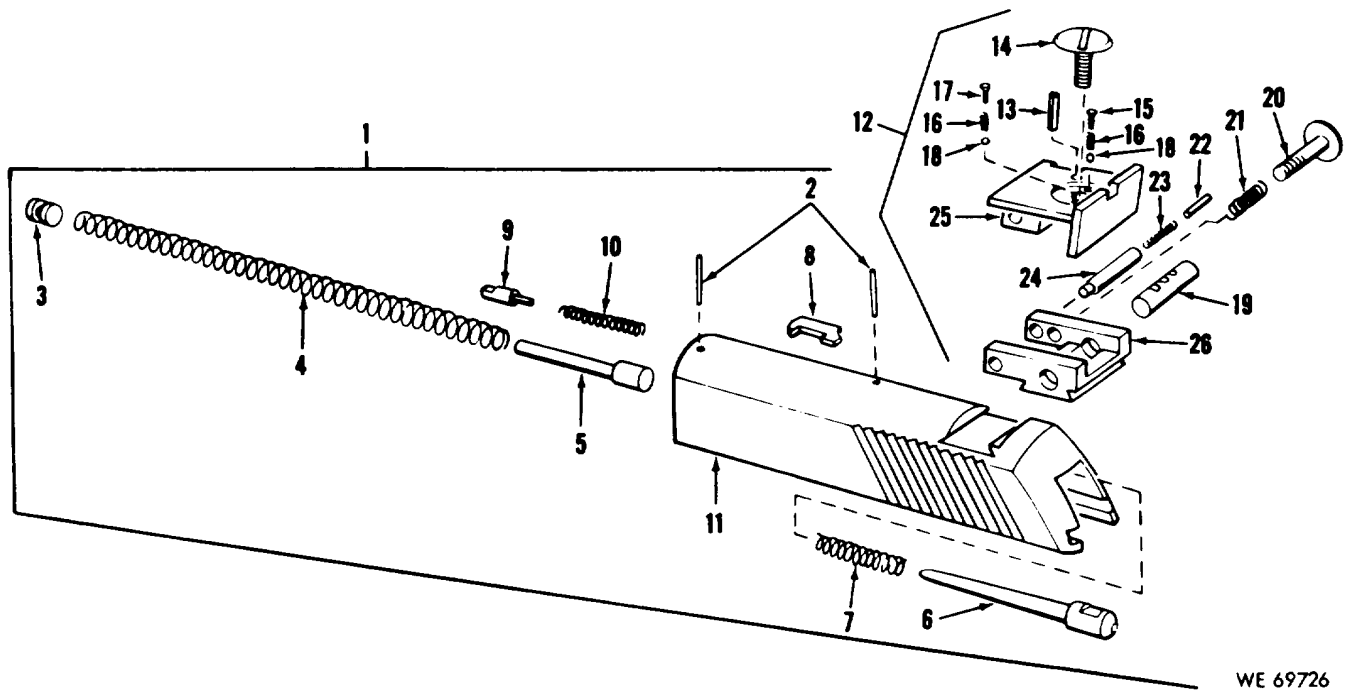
Slide group for Hi-Standard Supermatic Tournament cal. .22 automatic pistol-exploded view.
